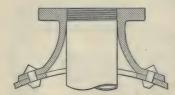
Forged Steel Nozzle with Dry-pipe Connection.
